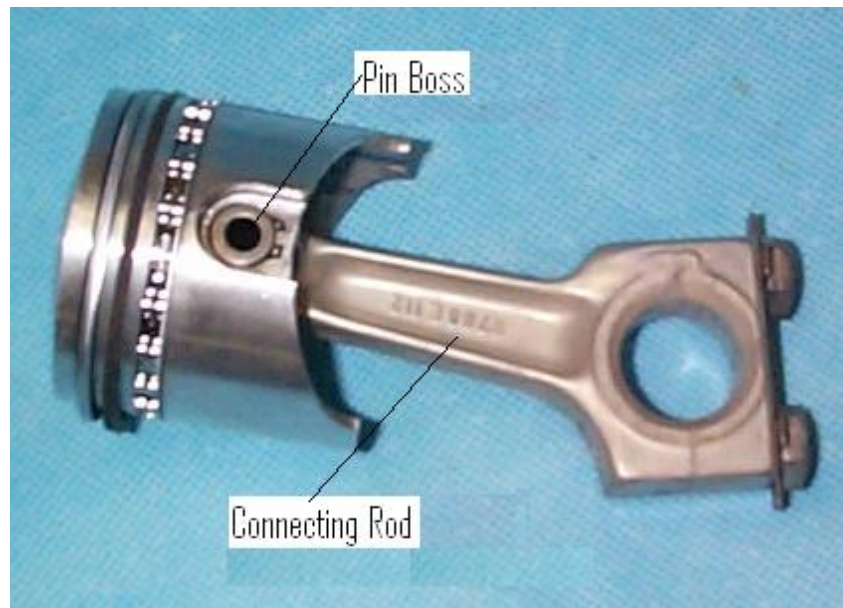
Piston, Pin Boss and Connecting Rod.
